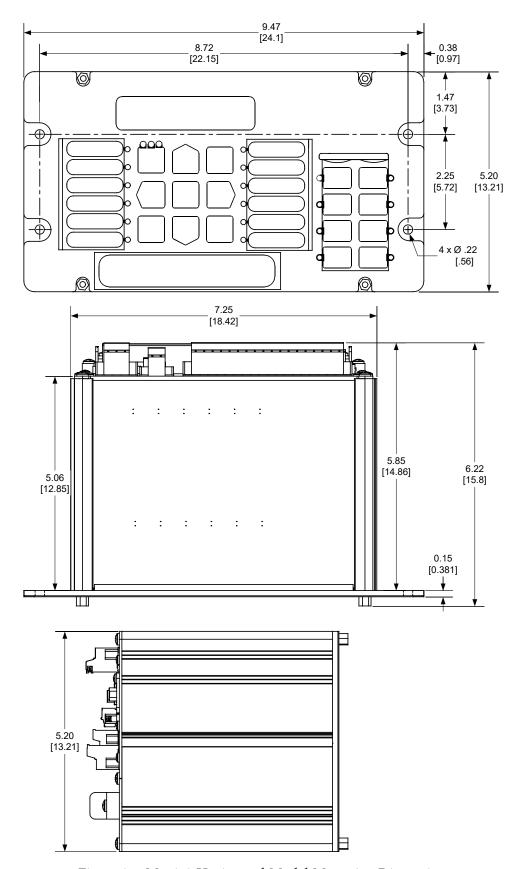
M-7679 Horizontal Model Mounting Dimensions
